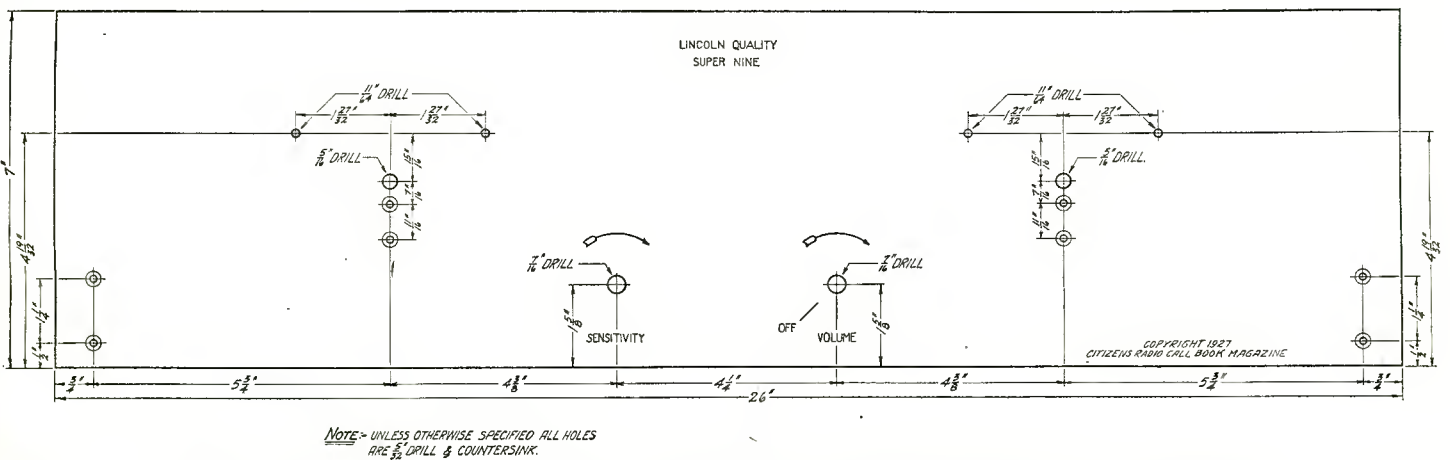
The above front panel layout will give all of the required dimensions and drill sizes
